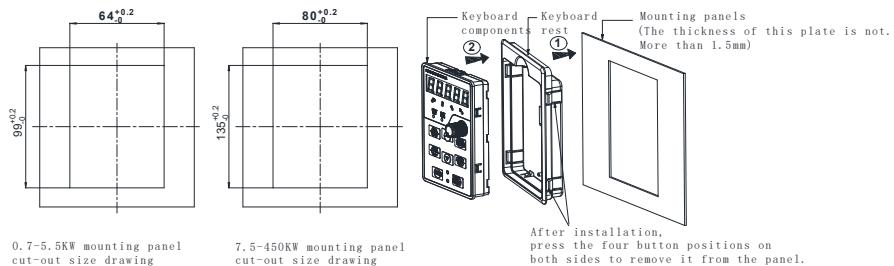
Dimensions of 4~110kW keyboard external installation opening
